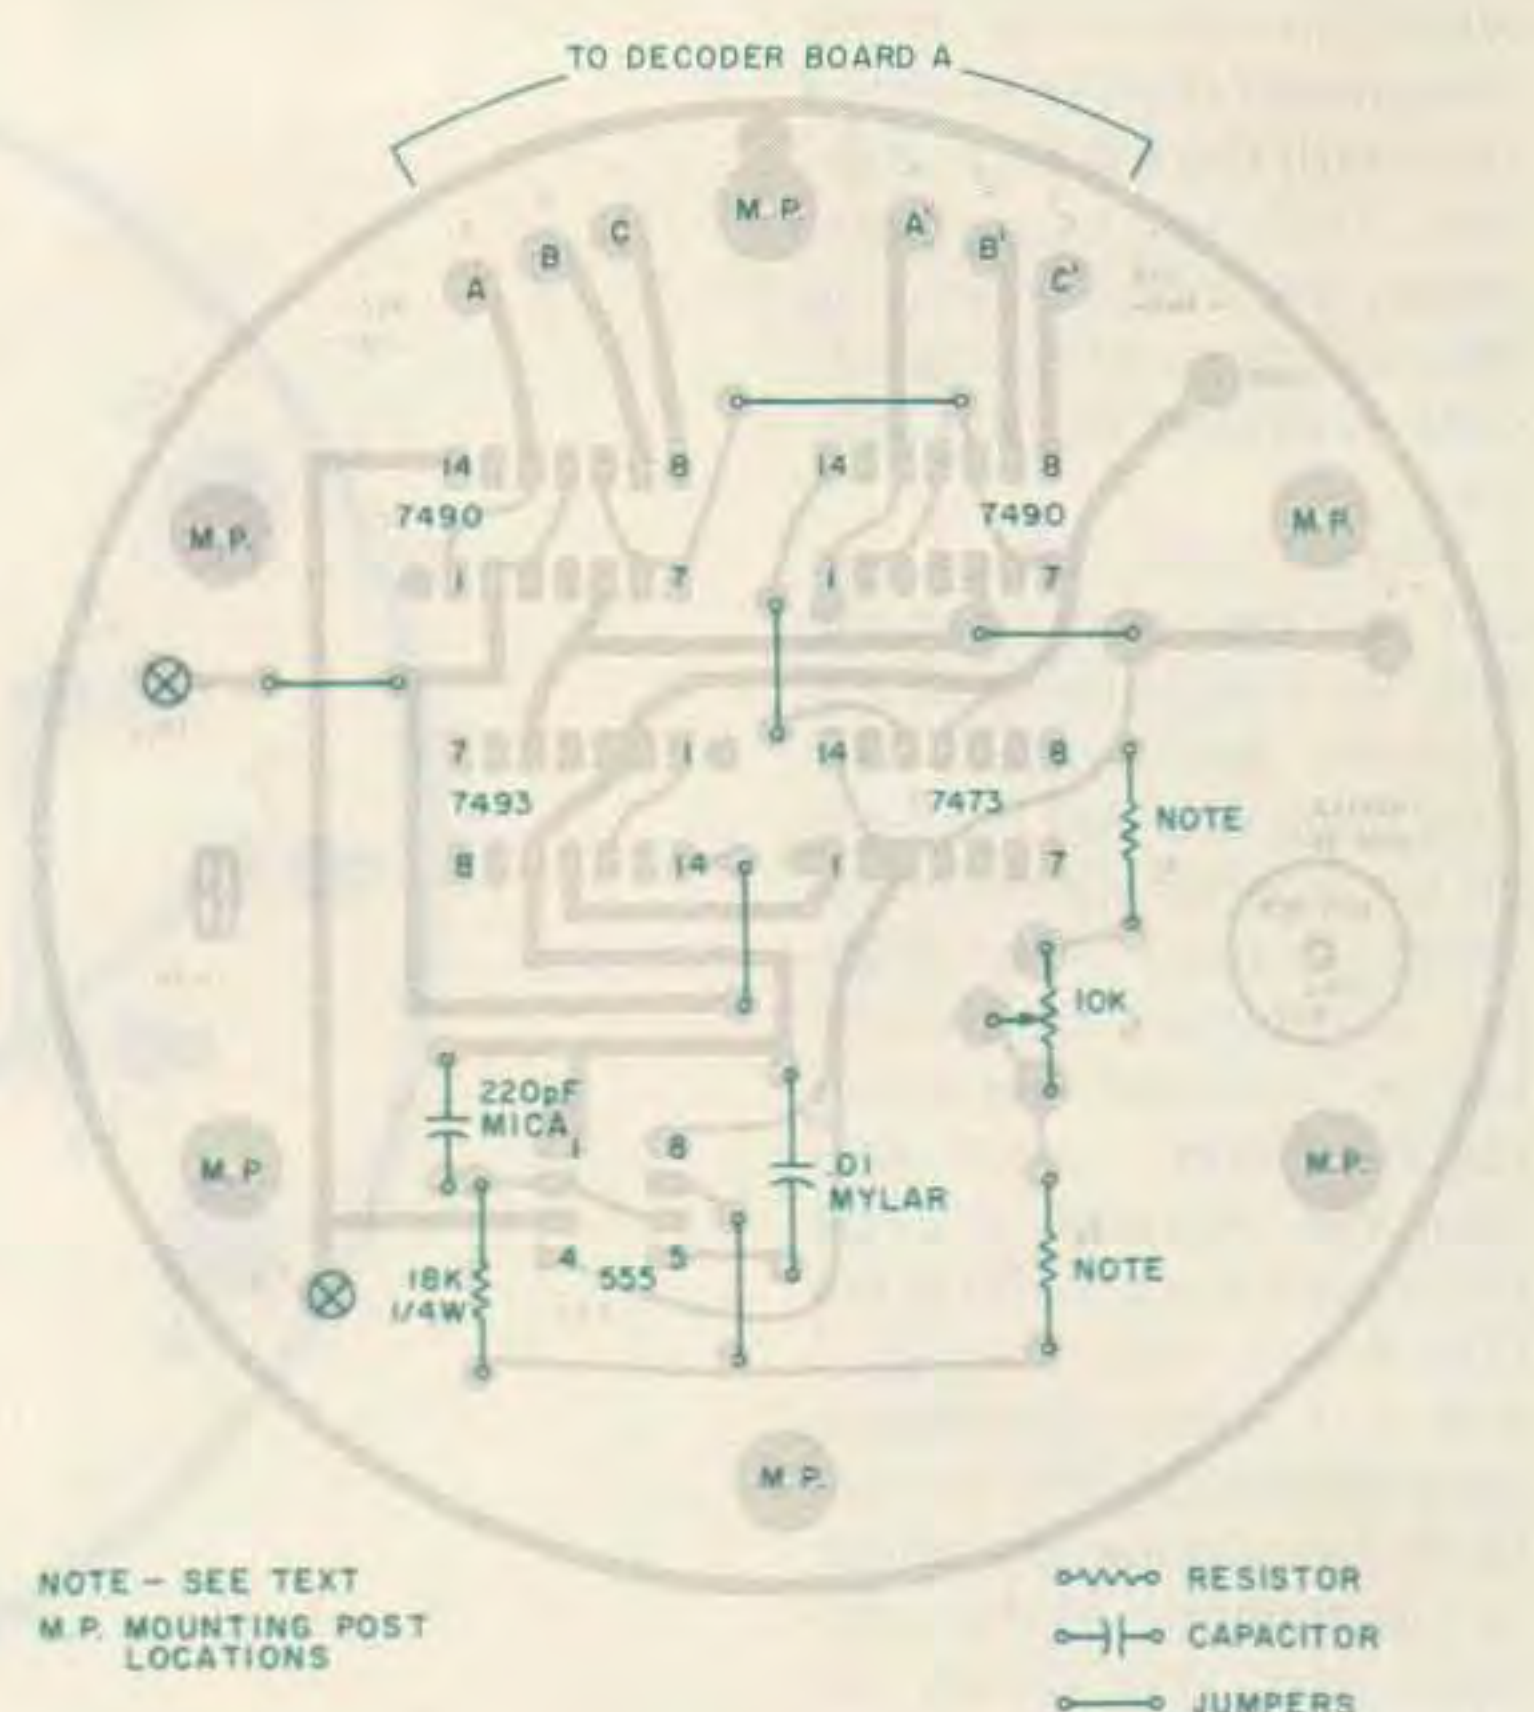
Component side of counter chain board. Standard schematic symbols are used to show component mounting locations. Solid lines connecting dots indicate jumper leads. Circled x indicates test point.
